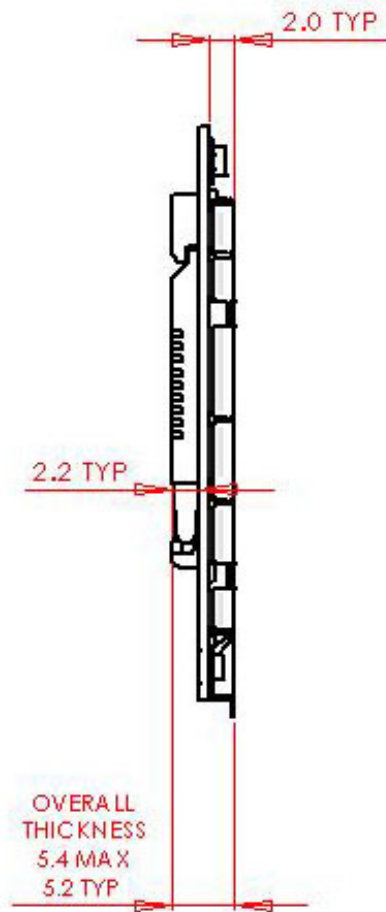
Enabler II-G Package Dimensions (with integrated SIM carrier)
